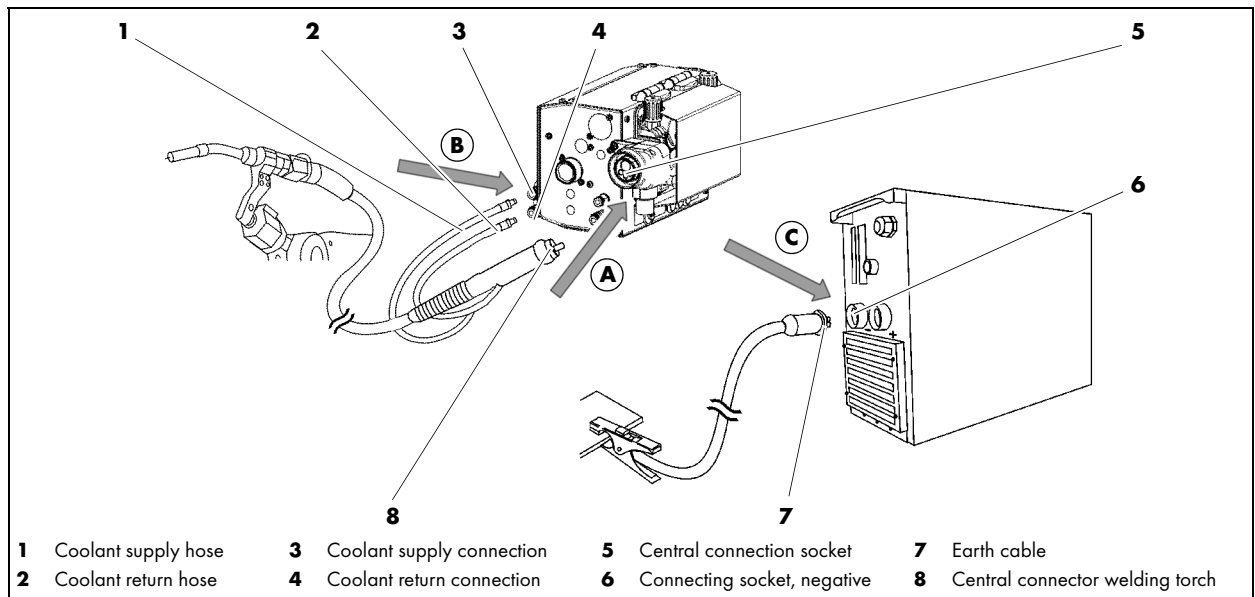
Cable assembly welding torch (euro central connector) iROB Feed 22 (version with the wire feeder mounted on the right)
